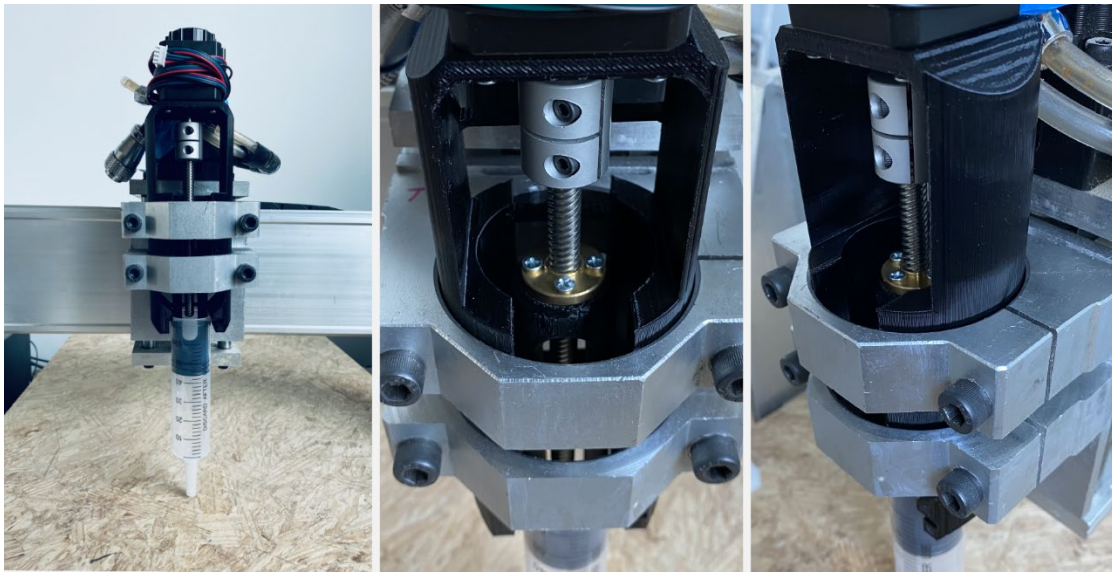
Syringe extruder designed to fit within the collet holder of the CNC machine.
